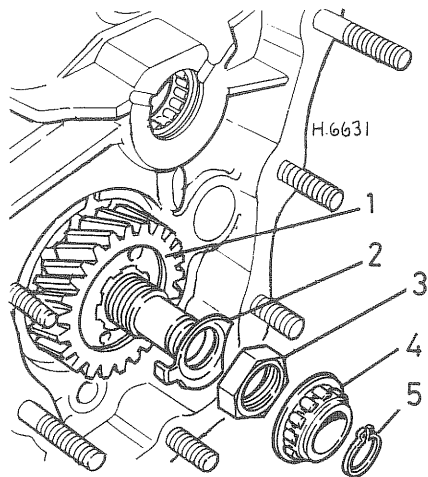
First motion shaft gear and bearing assembly (Sec 11)
